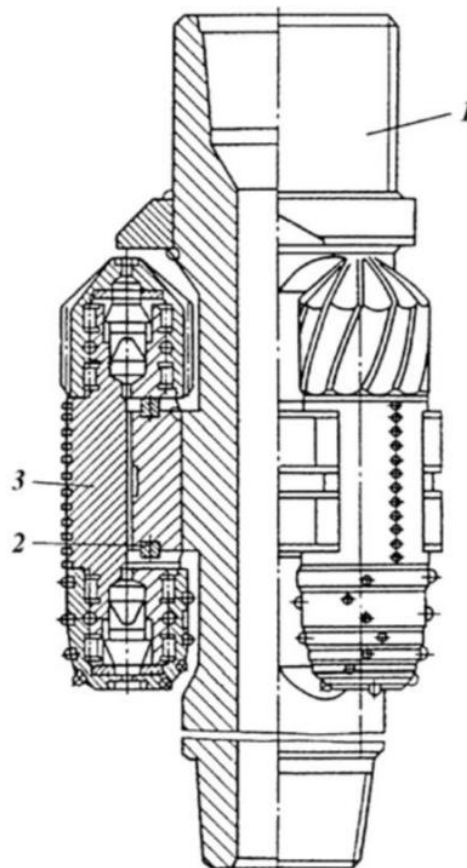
roller gager: 1 – housing; 2 – wedges; 3 – calibration unit\
